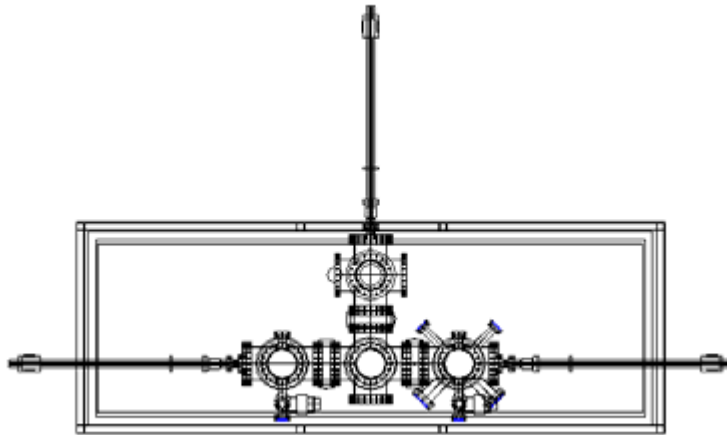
AutoCAD drawing of the PECVD/HWCVD system before recent expansion.
